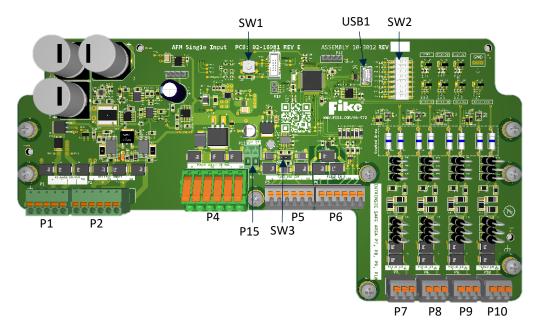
Single Input Actuator Field Module (P/N 10-3012) Board Layout
